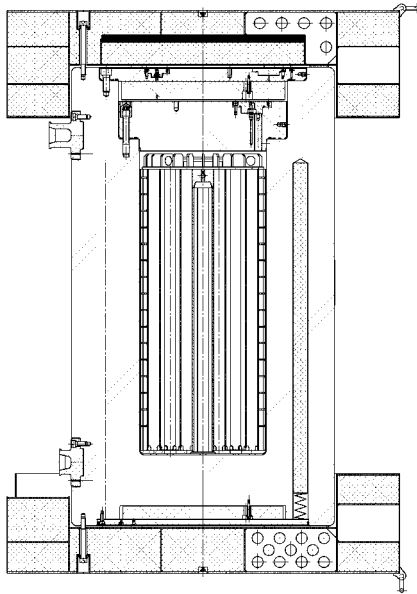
CASTOR® BR3 - Transport configuration configuration, Cross section
